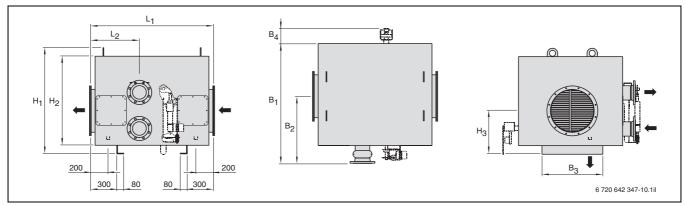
Dimensions flue gas heat exchanger ECO 6 SA (dim. in mm)
